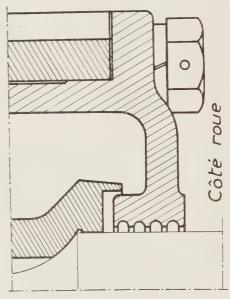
Timken outside type oil lubricated roller bearing axlebox with seal by means of a thrower and circular grooves.
